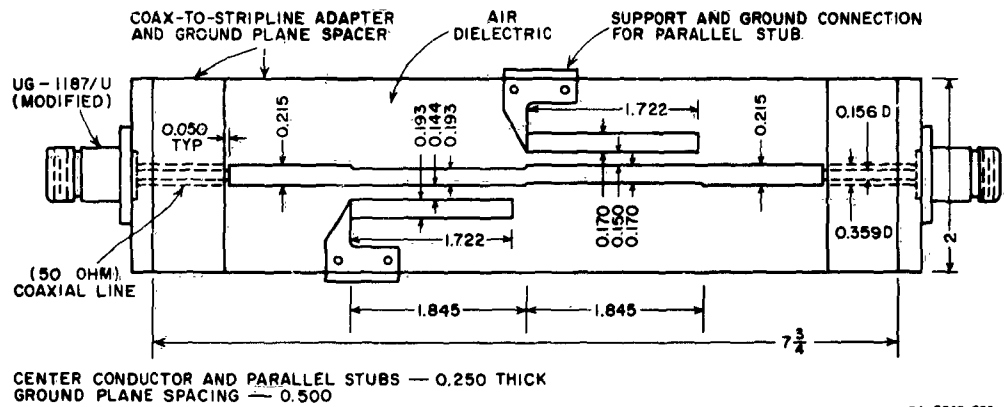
SKETCH OF A PARALLEL-COUPLED-LINE, NARROW-BAND FILTER WITH COVER PLATE REMOVED, SHOWING DIMENSIONS
